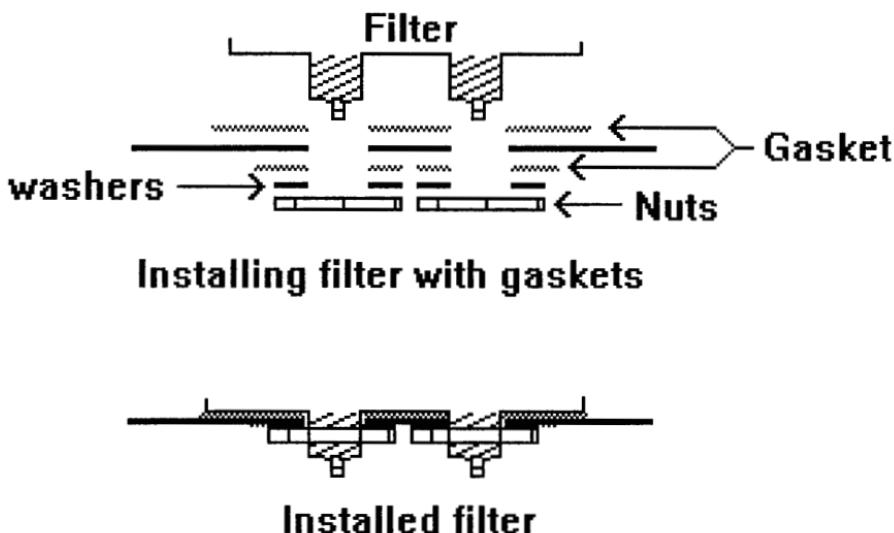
EMI gasket used to install a feed-through input filter.
